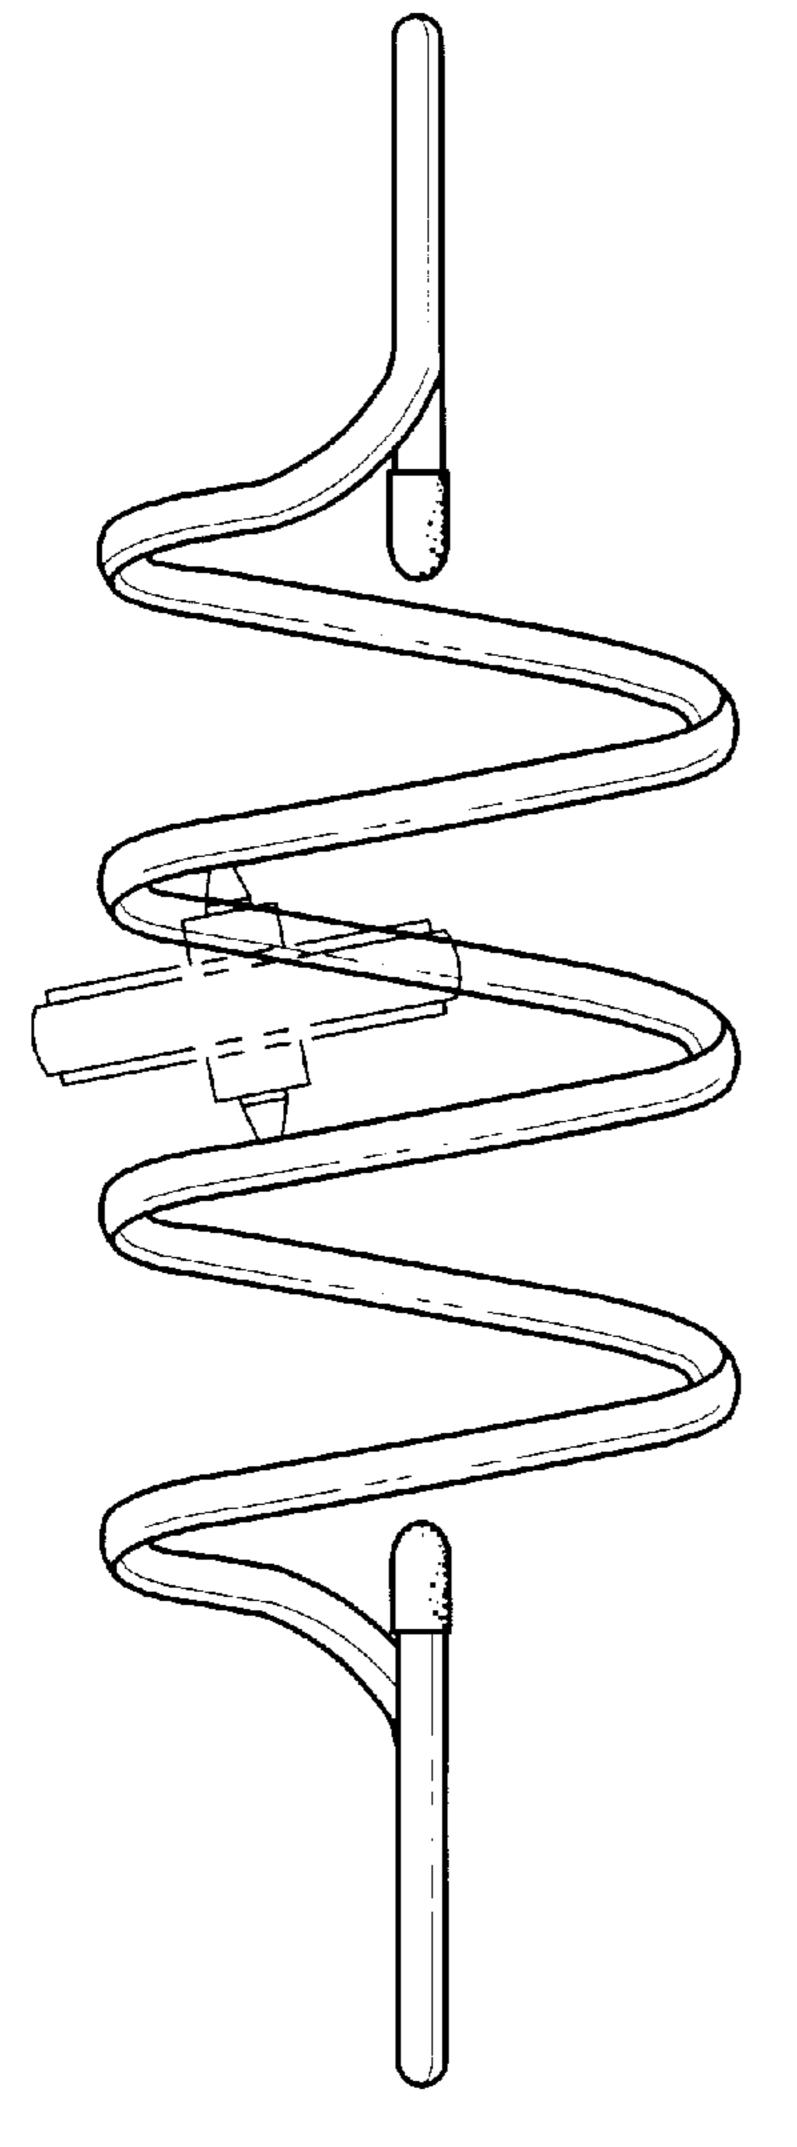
is a right side elevation view thereof with a magnetic wheel shown in broken lines for illustrative purposes only and forming no part of the claimed design, the left side elevation view being a mirror image thereof; and,
